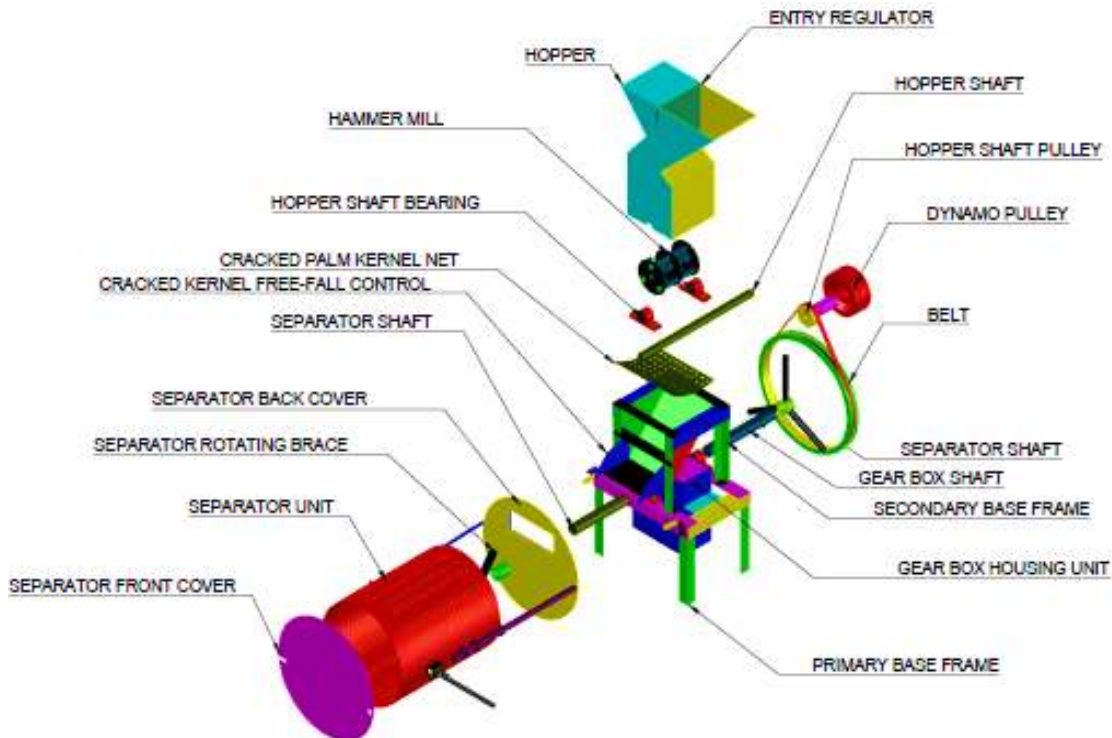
Exploded view of the fabricated palm kernel cracking and shelling machine
